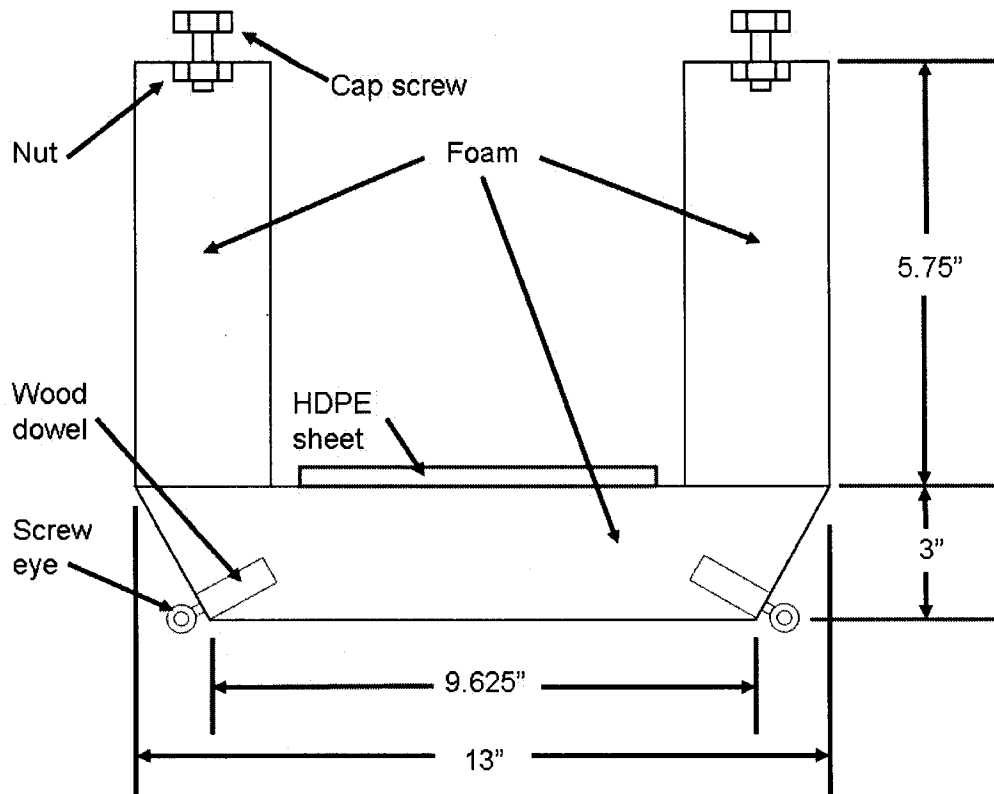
Cross-section sketch of the body/hull construction detail.
